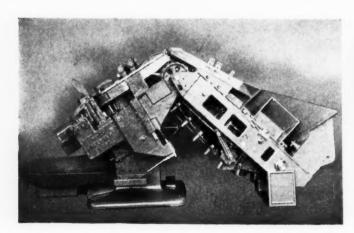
Automatic Thread-rolling Machine with Chain Hopper Feed
